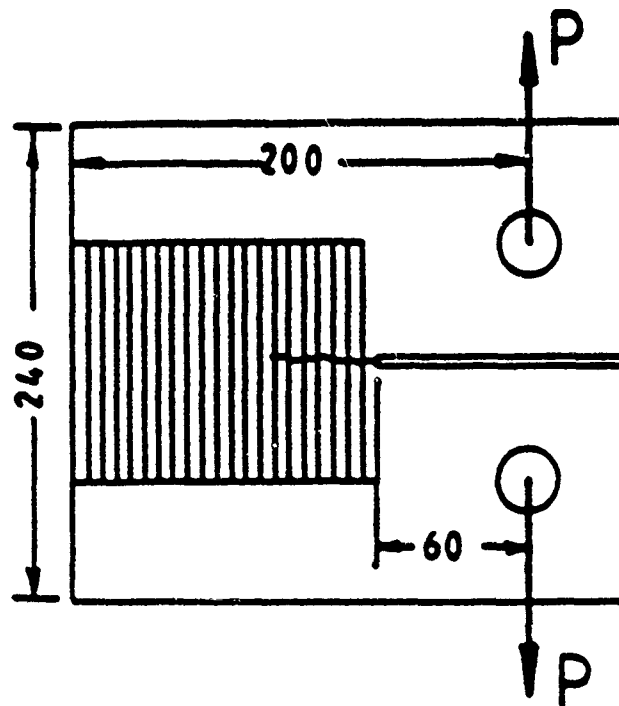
(a). Compact tension specimen dimensions in mm and strips cut for bending stiffness tests.
